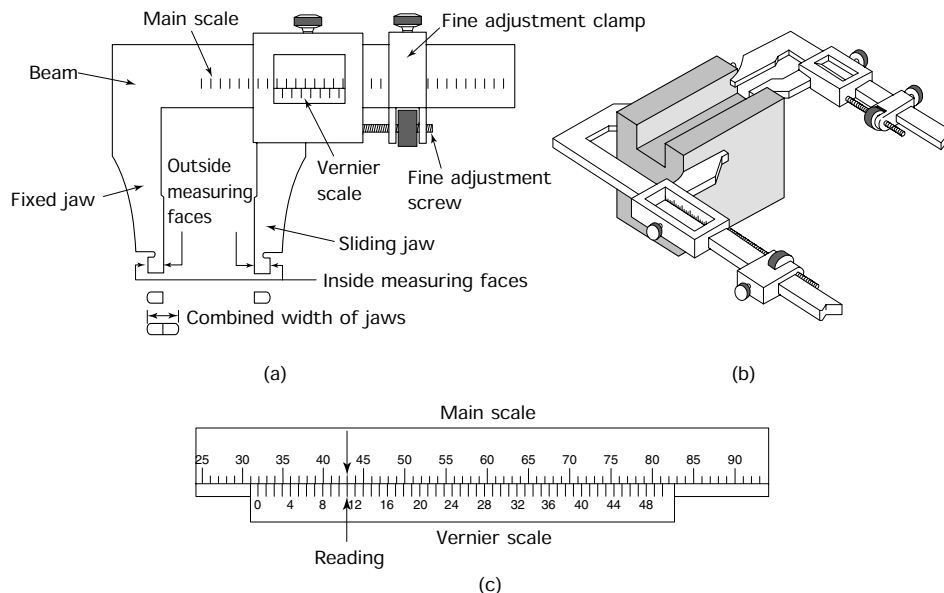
The vernier caliper: (a) construction; (b) use; (c) vernier scale (50 divisions)
